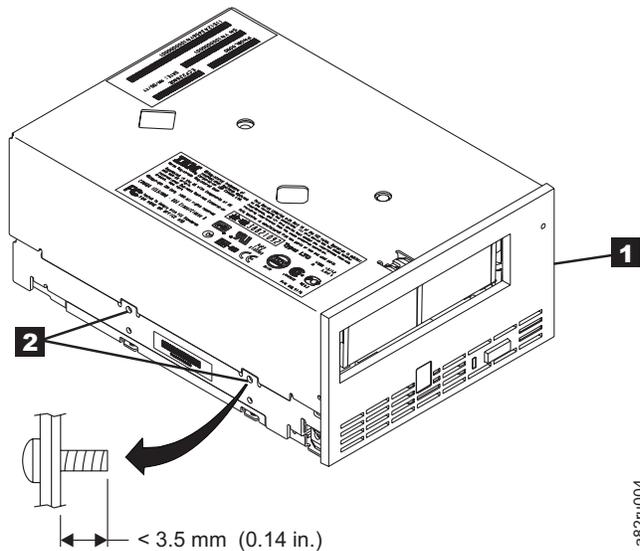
Mounting holes on drive. The holes are located on both sides of the drive. The drive is shown with a front bezel.
